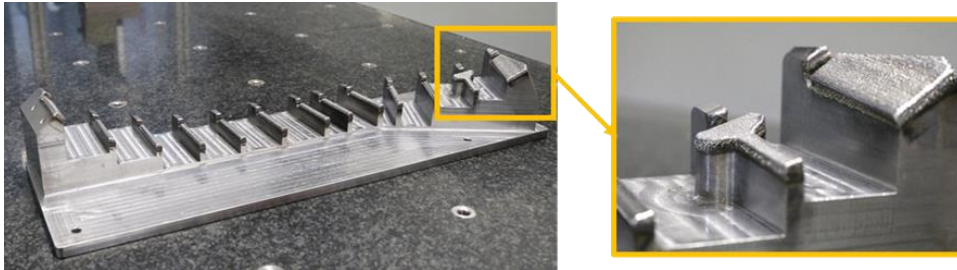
Demonstrator part after 15CDV6 coating in L-DED.
